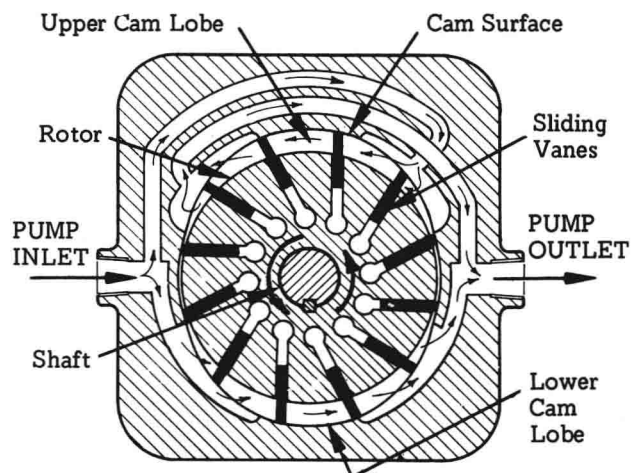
(A). Vane-Type Hydraulic Pump.
